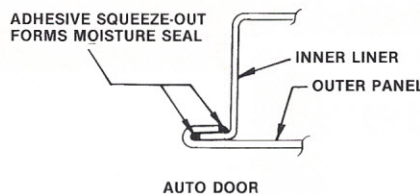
In a typical car door construction the flange is bent over to make a triple thickness of metal at the door edge. The adhesive not only strengthens the joint and reduces squeaks and rattles, but also forms a seal to keep moisture out.
